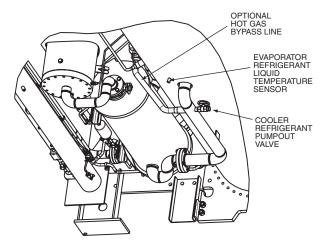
Evaporator Refrigerant Liquid Temperature Sensor on Bottom of Cooler (Units with Q,R Compressors Shown)
